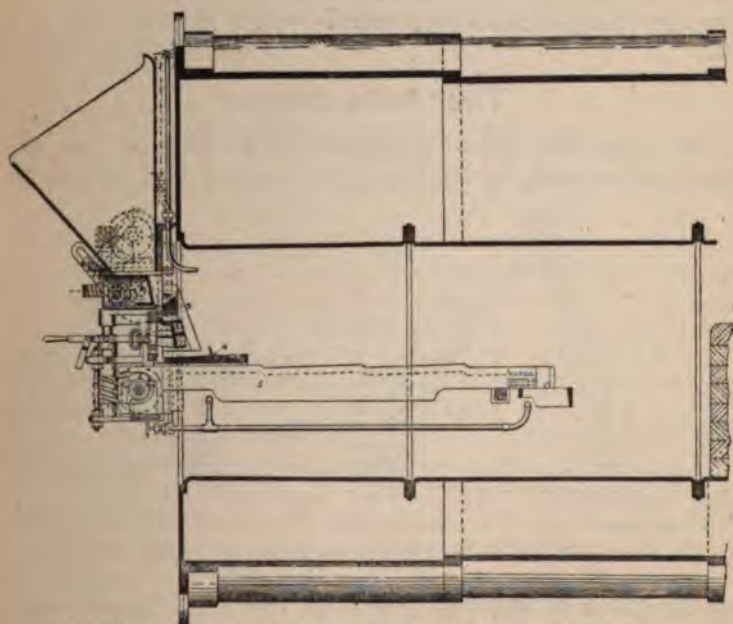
Longitudinal Section of a Mechanical Stoker fitted to a Lancashire Boiler.
